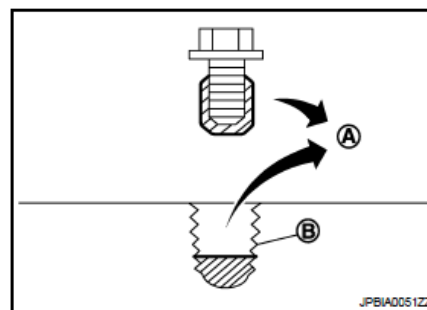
Removing Old Liquid Gasket From Bolt Hole And Thread
